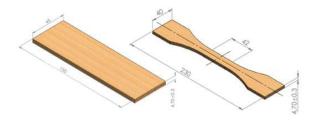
Specimen geometry: (left) bend specimen; (right) tensile specimen.
